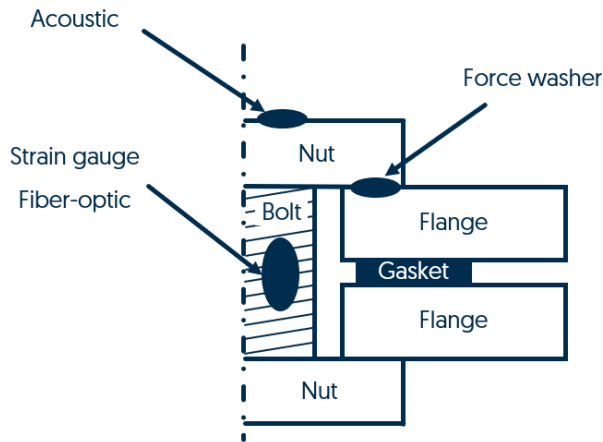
Overview of bolt load monitoring locations in a bolt assembly.
